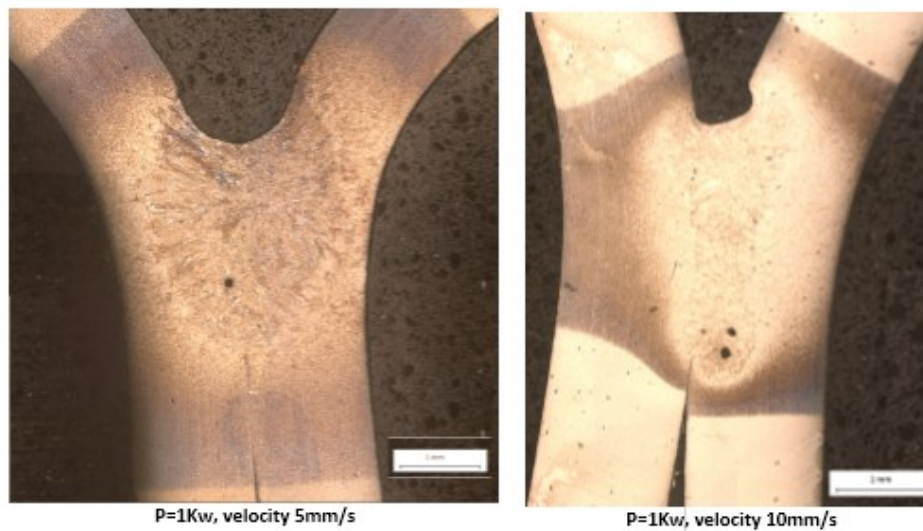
Proximity laser welding, spot dimension=0.1mm
